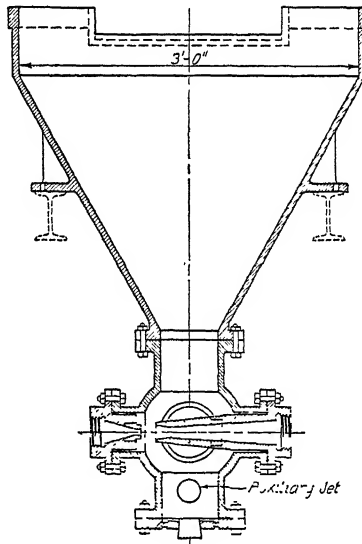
Section of Ejector Washer Used in Filtering Plant at Washington, D. C.
